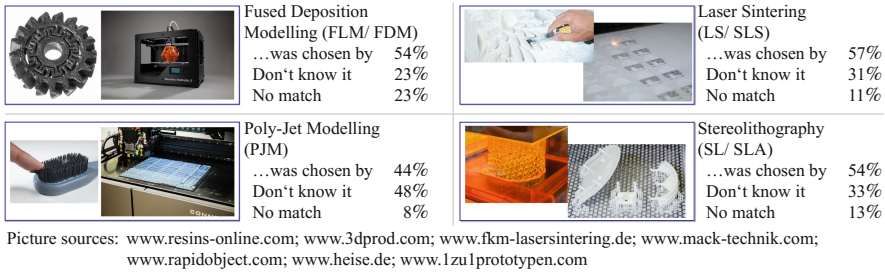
Matching pictures of AM machines and parts to the name of the technology
